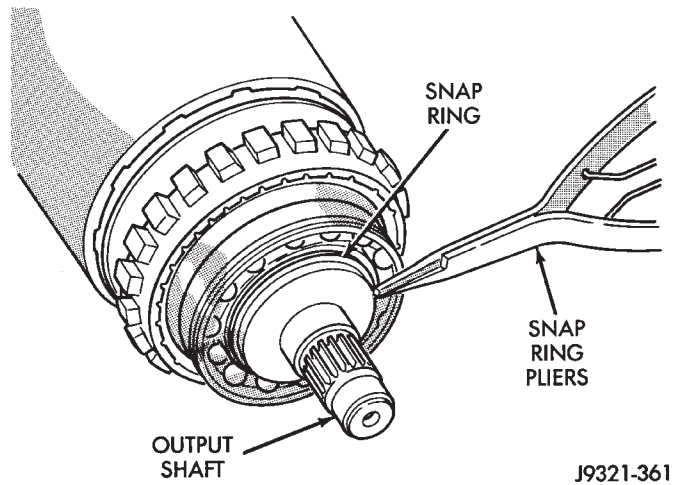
Rear Bearing Snap Ring Removal/Installation
